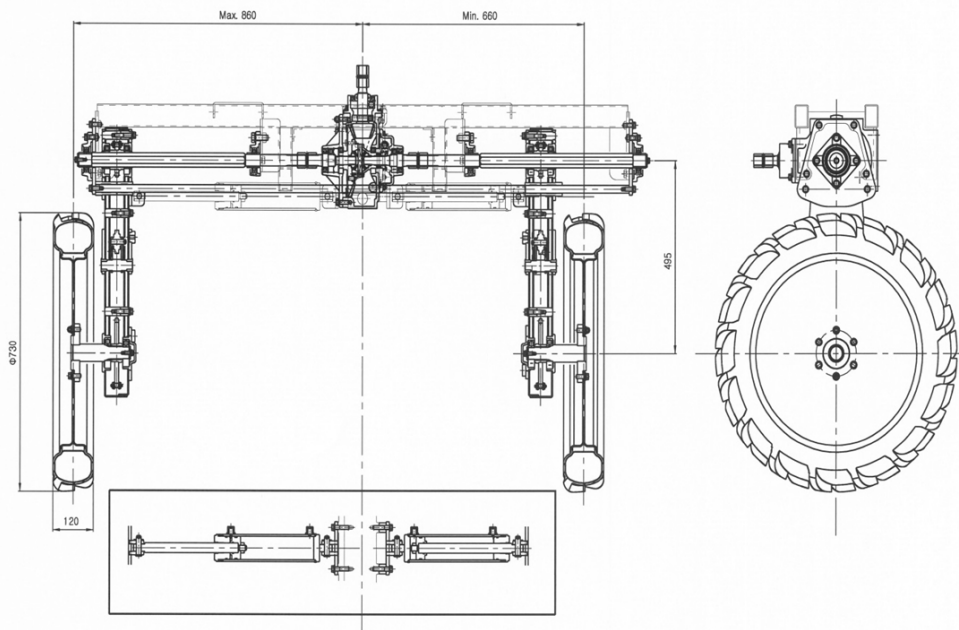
The rear wheel driving and wheel tread adjusting mechanisms.
